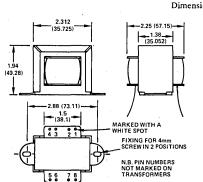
Outline Drawing and Dimensions of the D3953 Transformer
